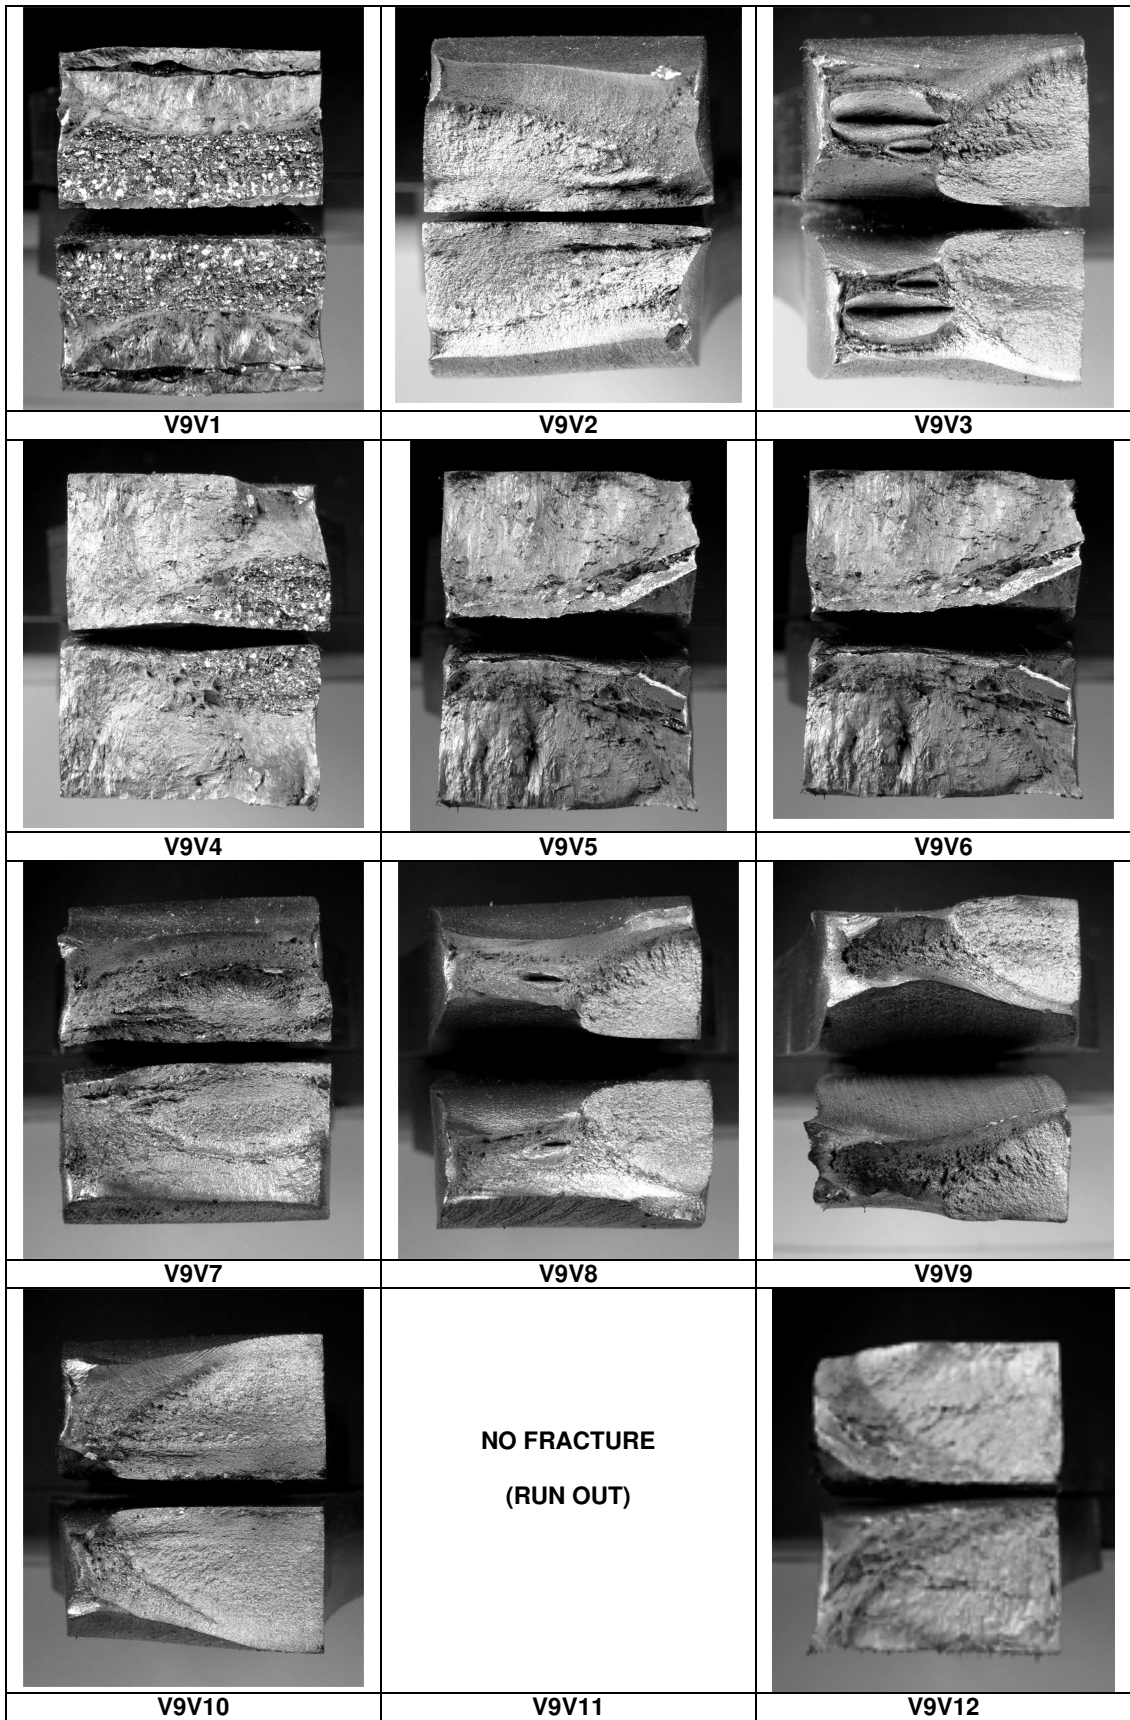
Fatigue fractographs of samples from 12 mm thick SMAW weld (V9).
